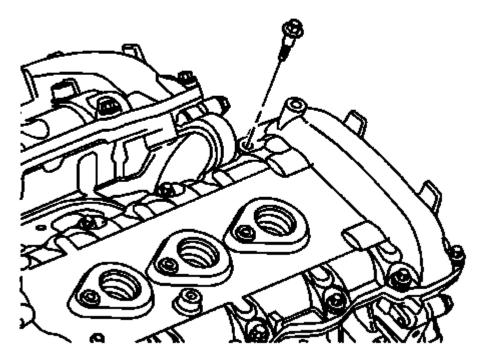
View Of Right Camshaft Cover Courtesy of GENERAL MOTORS COMPANY
